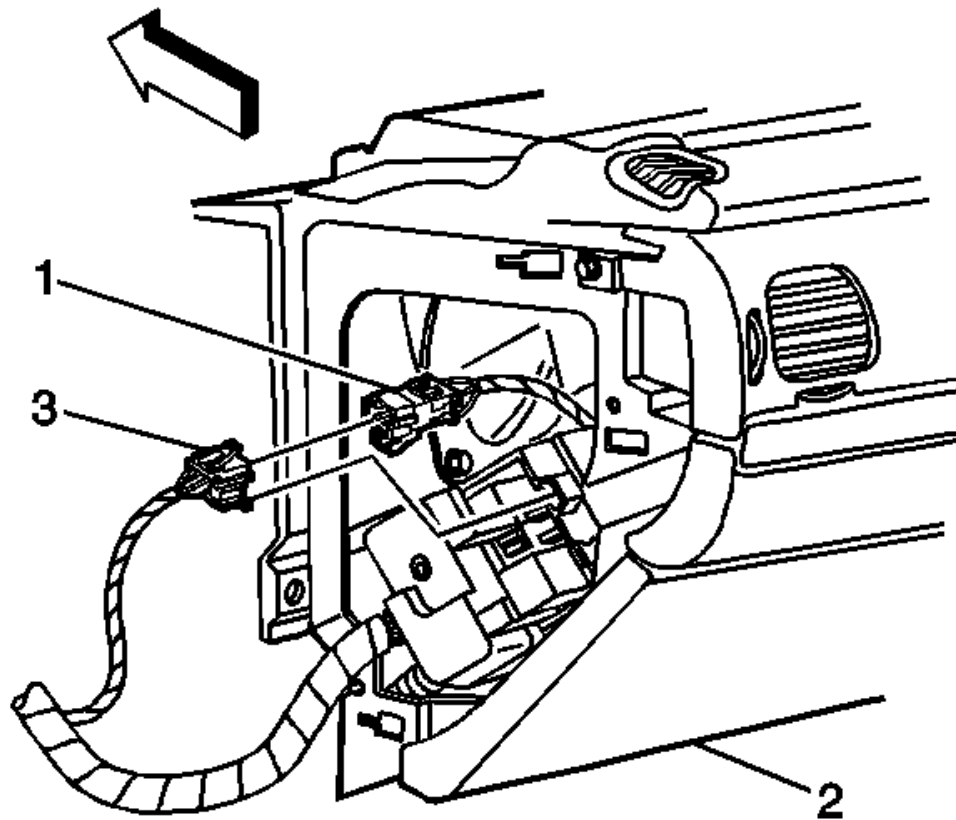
Identifying I/P Module Connector To Vehicle Harness Connector (LH Side I/P)
